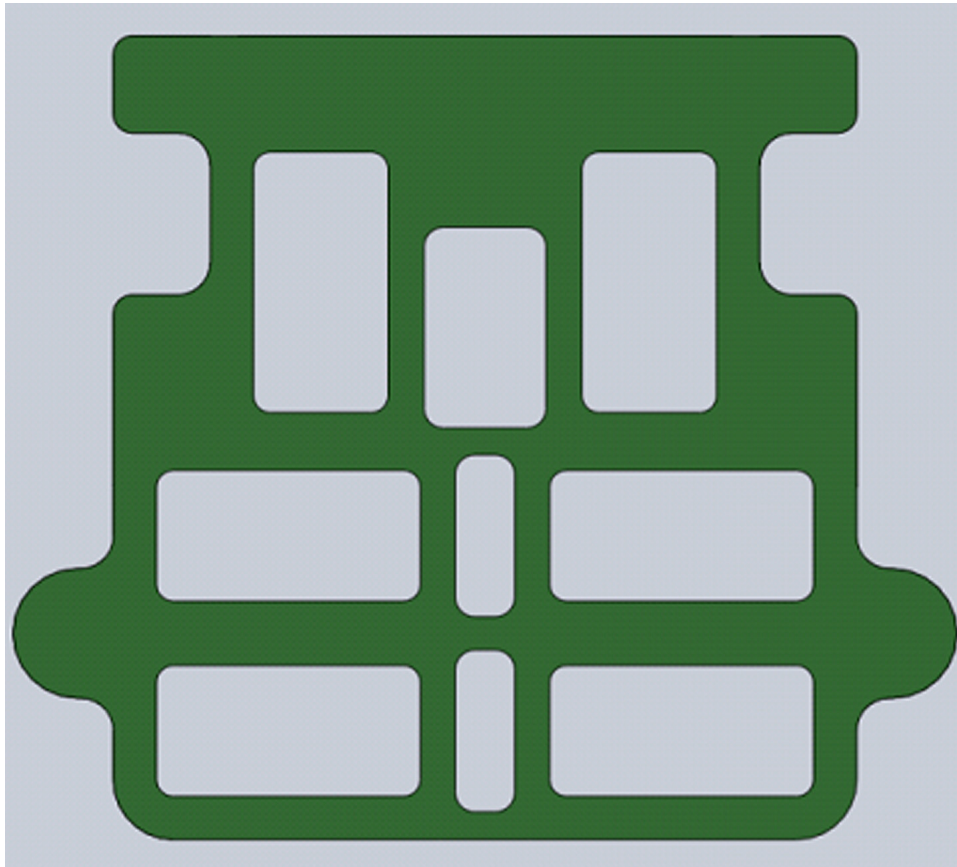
A top view of the 3-D drawing of the platen's frame.
